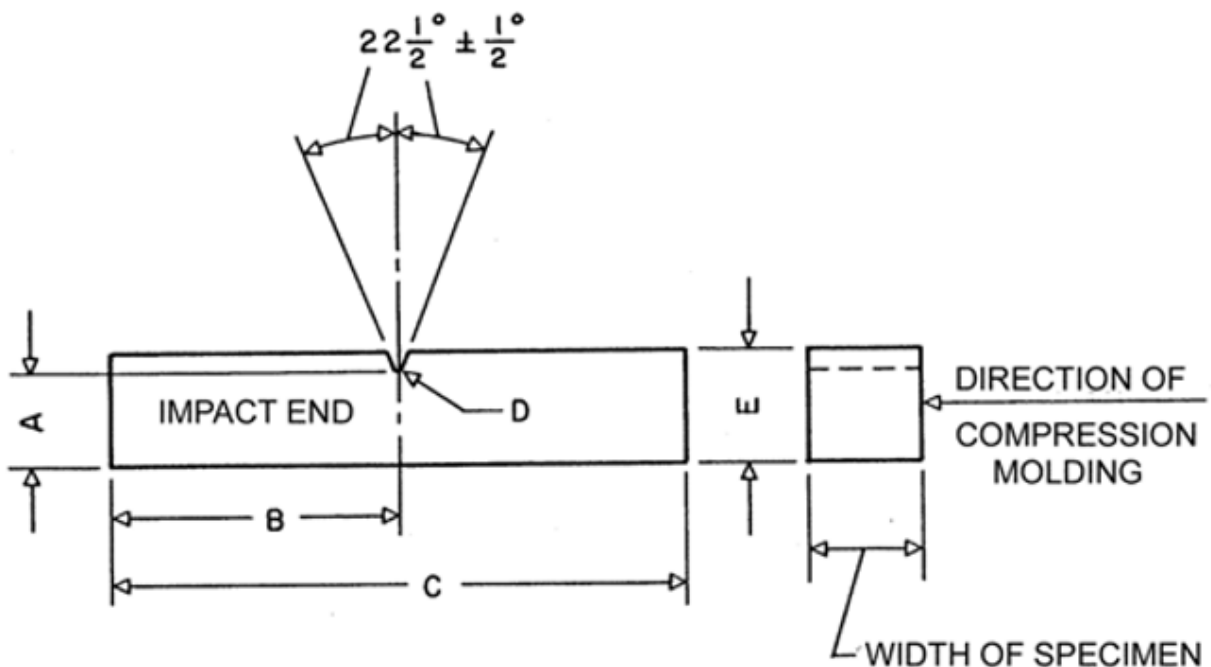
impact testing specimen dimension (A=10.16±0.05mm, B=31.8±1.0, C=63.5±2.0mm, D=0.25R±0.05, E=12.70±0.20mm, width=3.0mm-12.7mm)[34]
